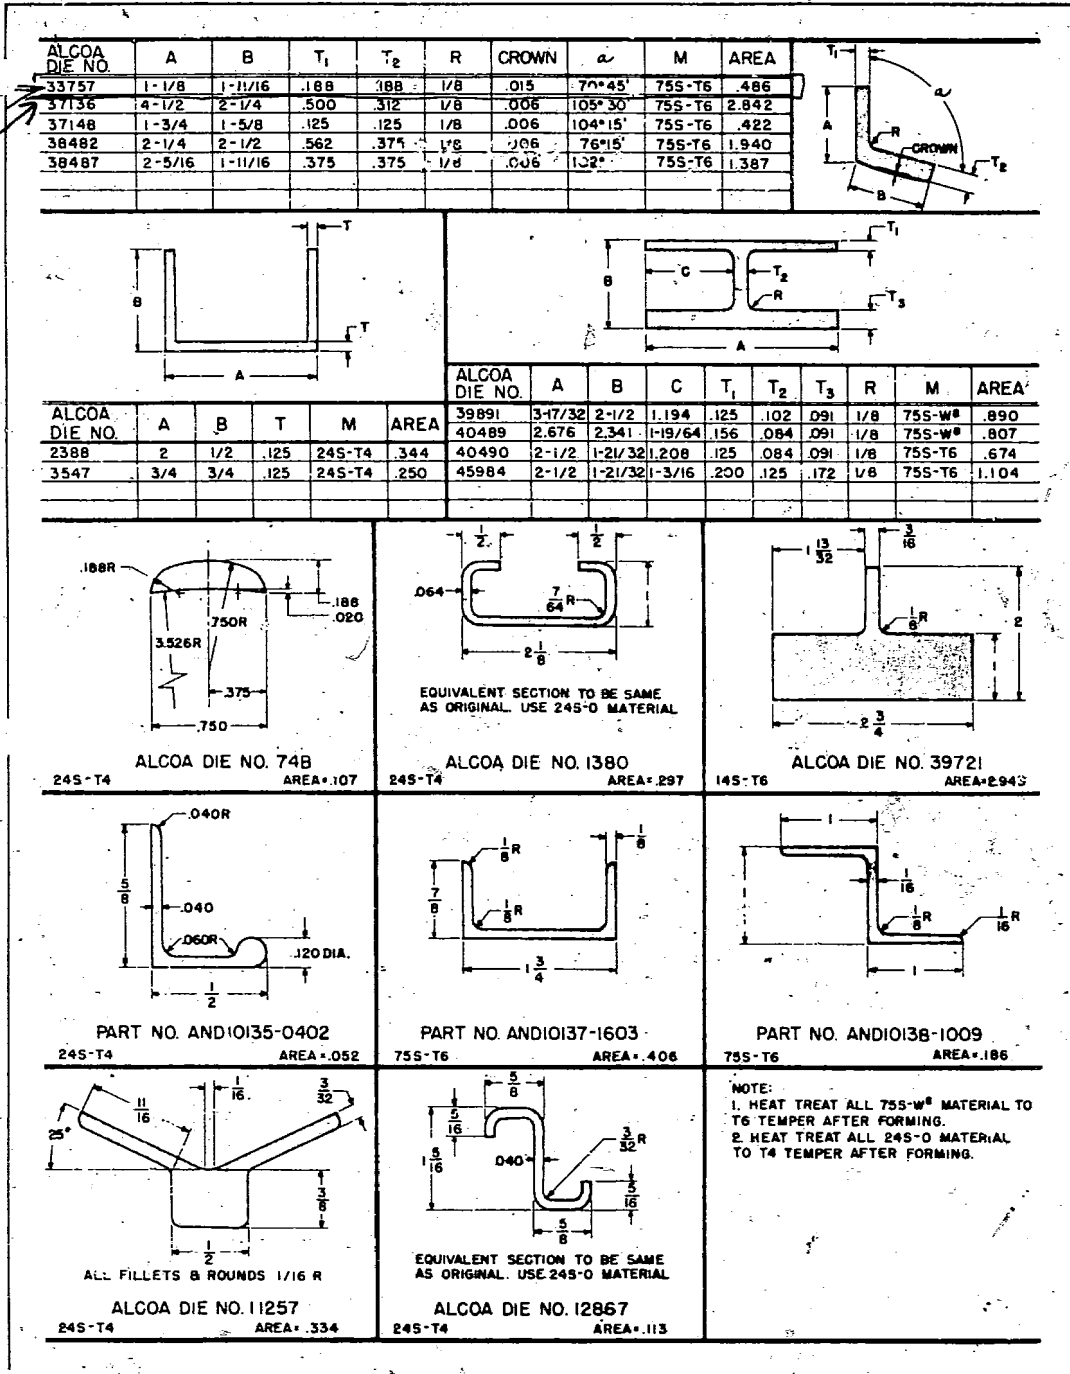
(Sheet 4) Extrusions and Rolled Sections
